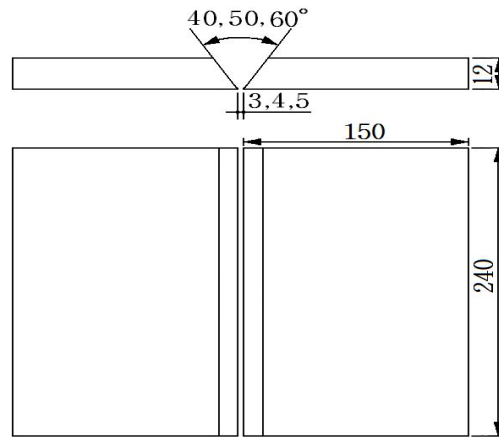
Non-restraint welding joint shape of specimens
